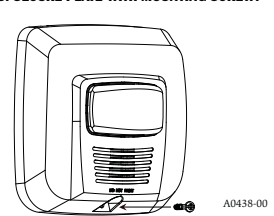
A. MOUNTING PLATE ATTACHMENT:
